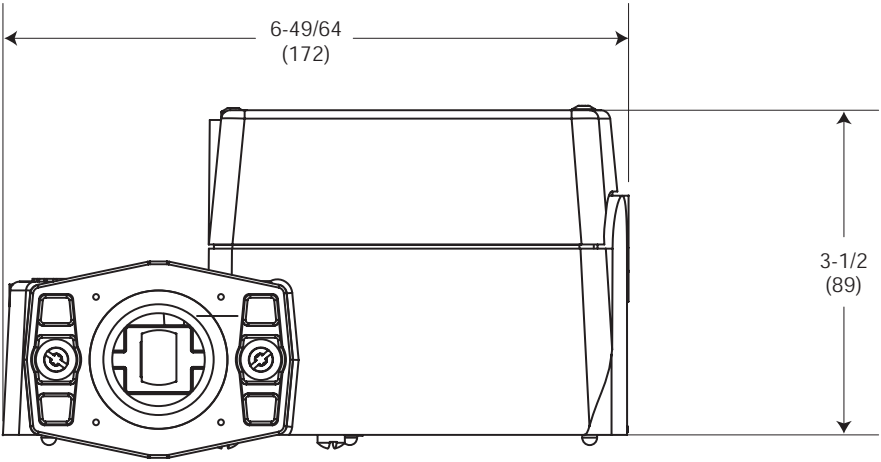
Mx51-710x Spring Return Valve Actuator Dimensions
